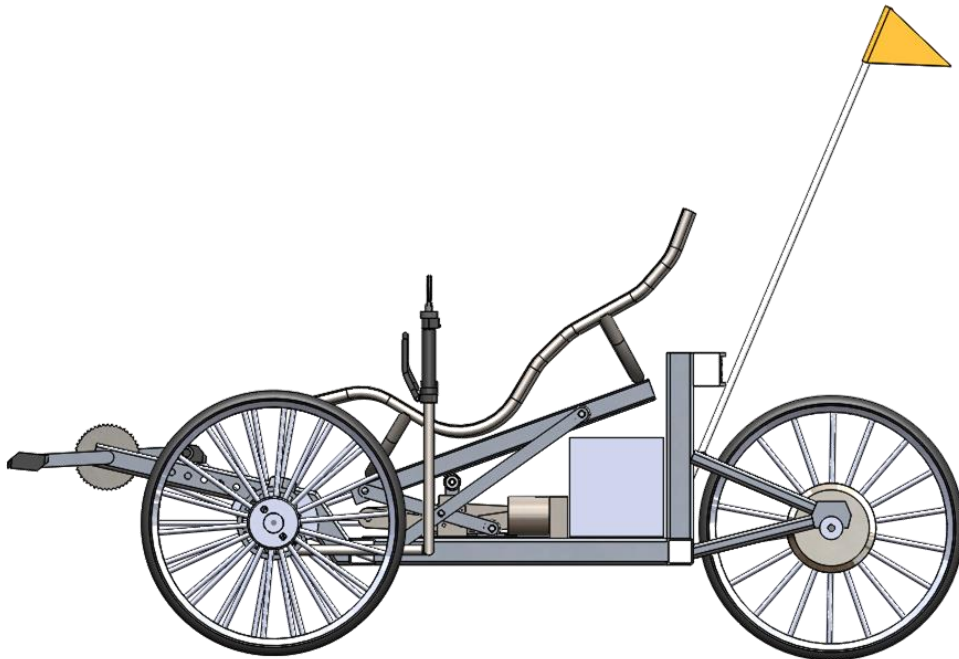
Side View of Original Heliocycle CAD in Lowered Position [9].
